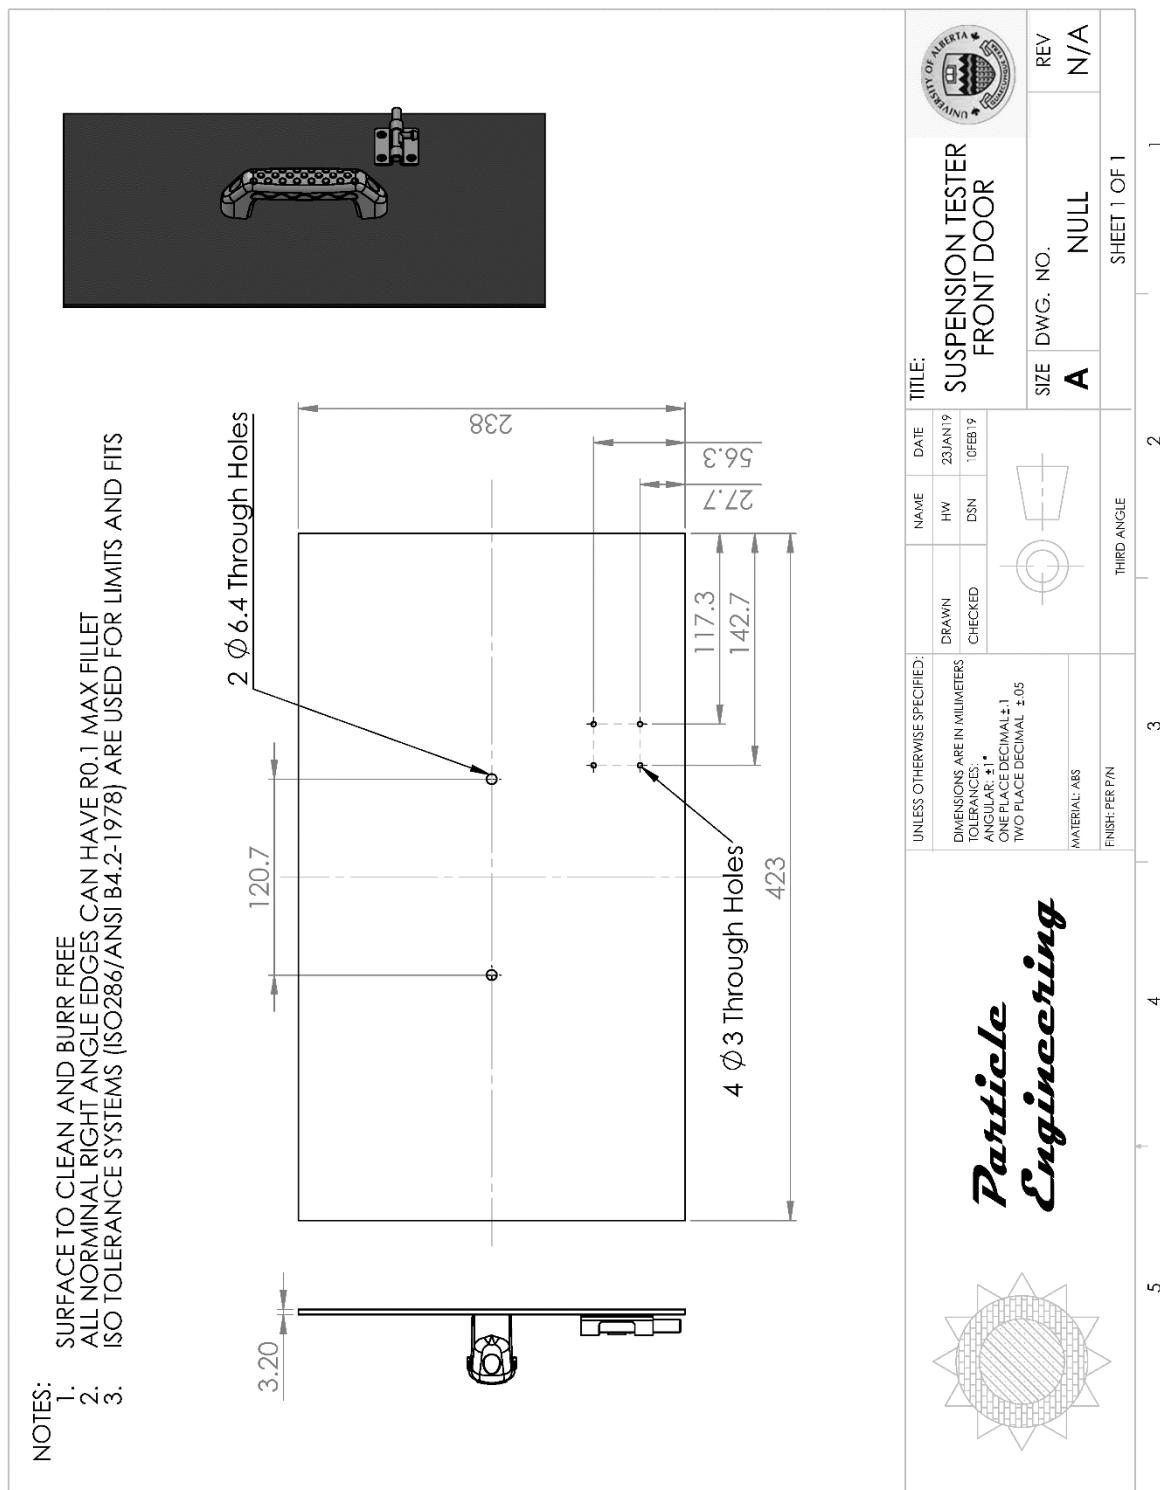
CAD drawing for the front door of the light-proof sample chamber.
